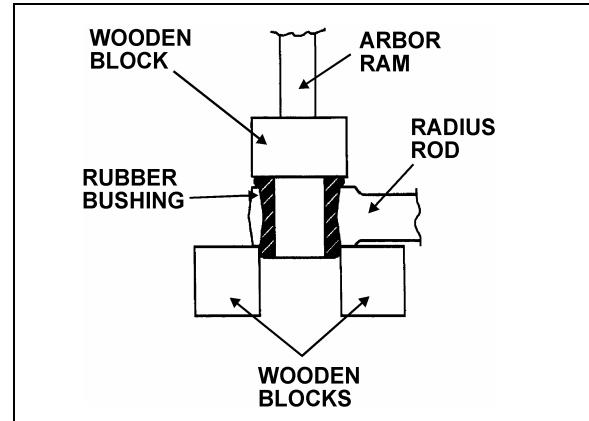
RADIUS ROD BUSHING INSTALLATION
